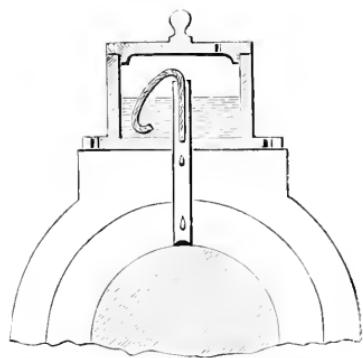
SIPHON LUBRICATOR ON PEDESTAL BEARING. (Page 98.)
